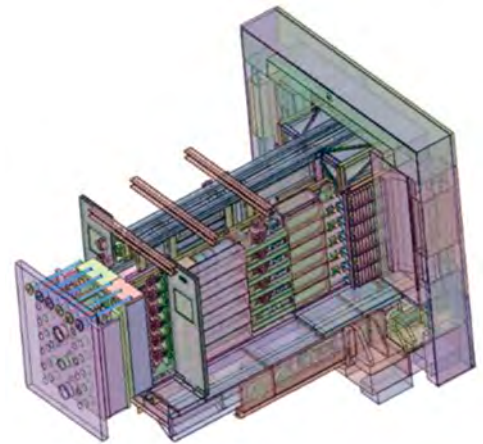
Ex-vessel neutronic CAD model with additional shielding arranged immediately after the closure plate.
